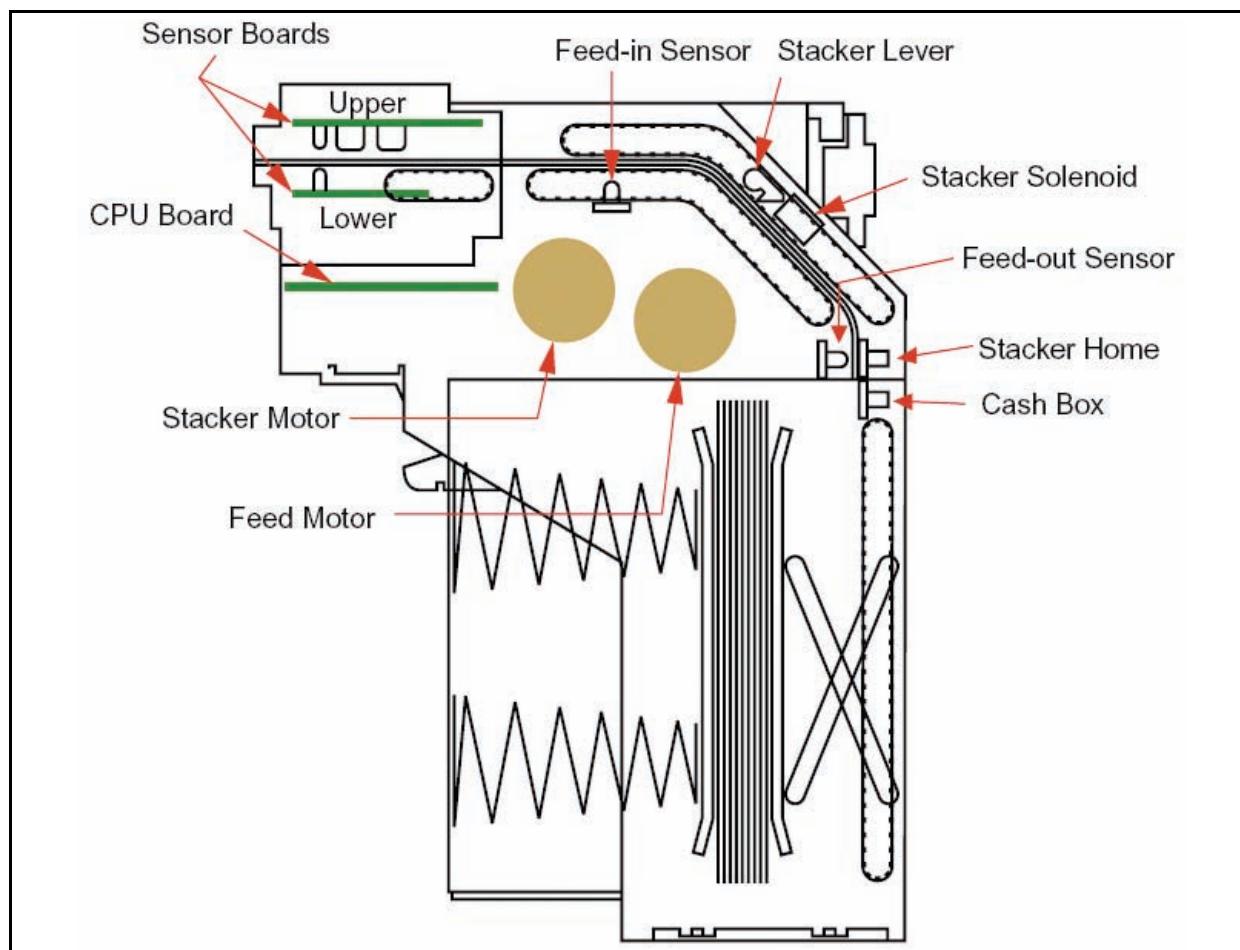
WBA-1X/2X Sensor, Circuit Board and Motor Location Diagram
